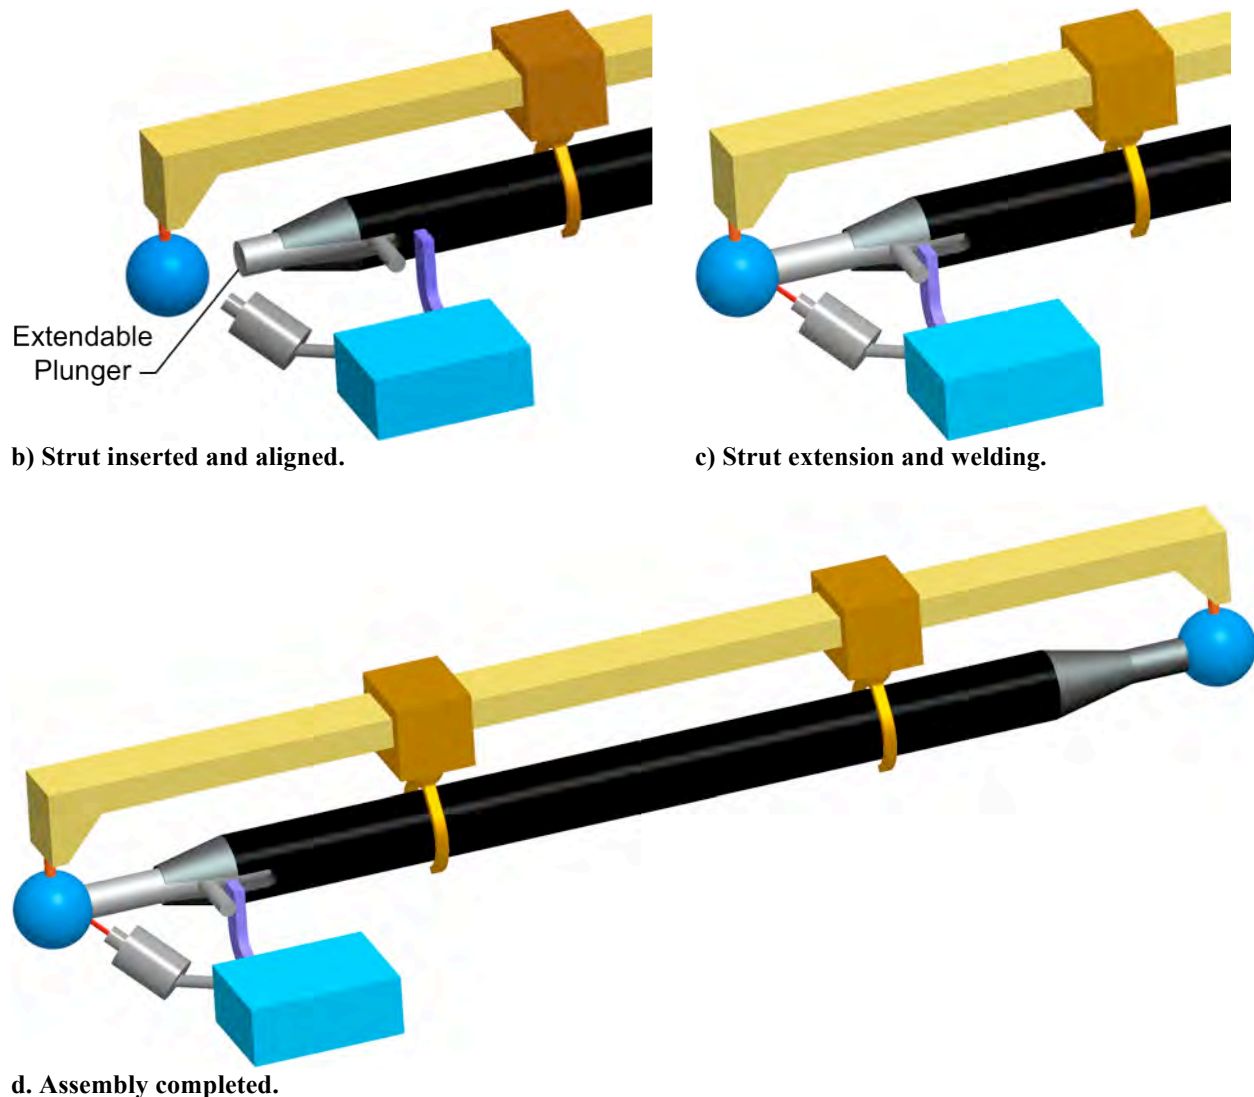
Weldable truss strut and assembly (concluded).
